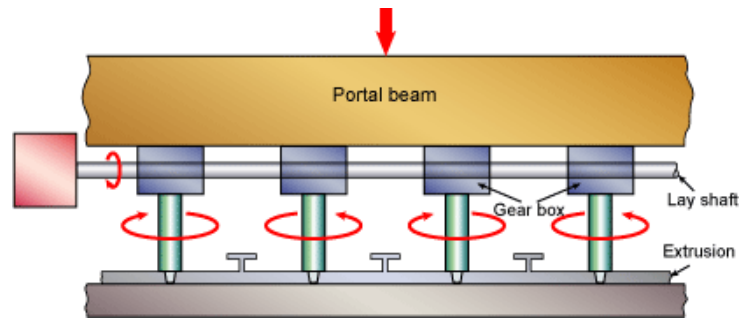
Multi-head friction welding machine (Thomas, 2005)
